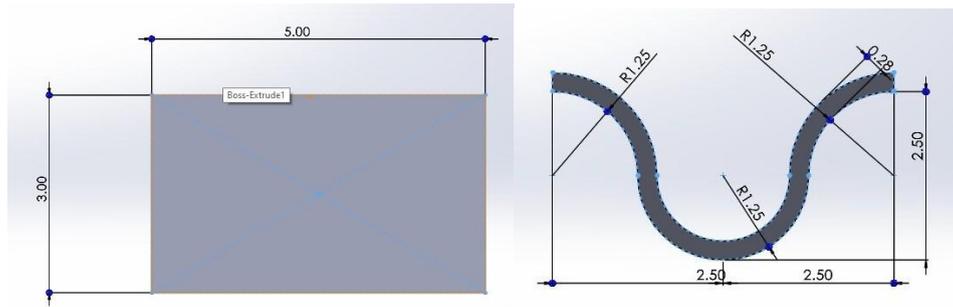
Dimension of the panel (left) and Dimension for the core (right)
